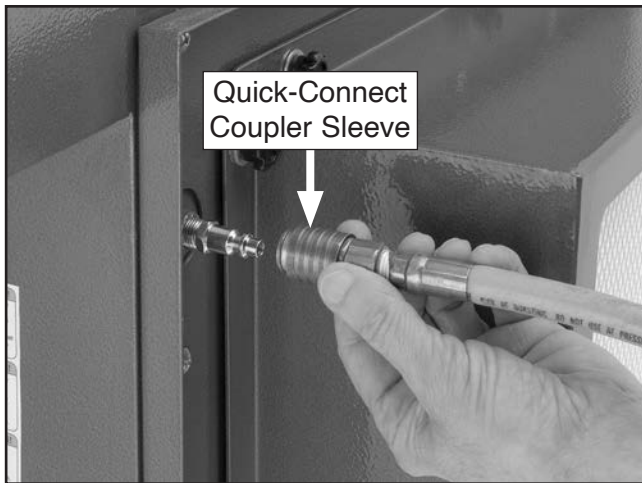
Air supply quick-connect coupler sleeve pushed back.
